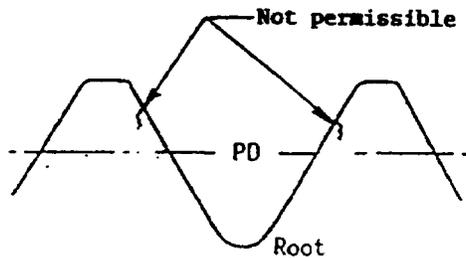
LAPS ABOVE PD EXTENDING TOWARD ROOT, ROLLED THREAD
